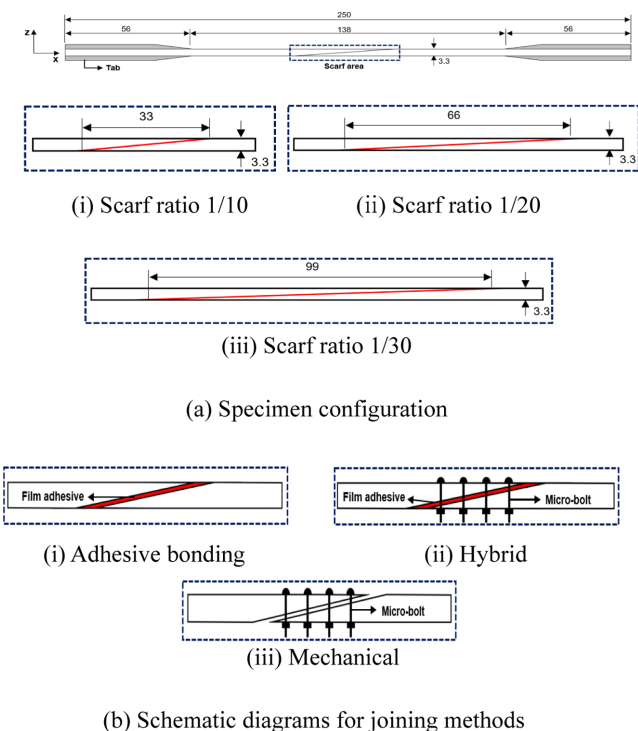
Configurations of scarf joint specimens (unit: mm)
